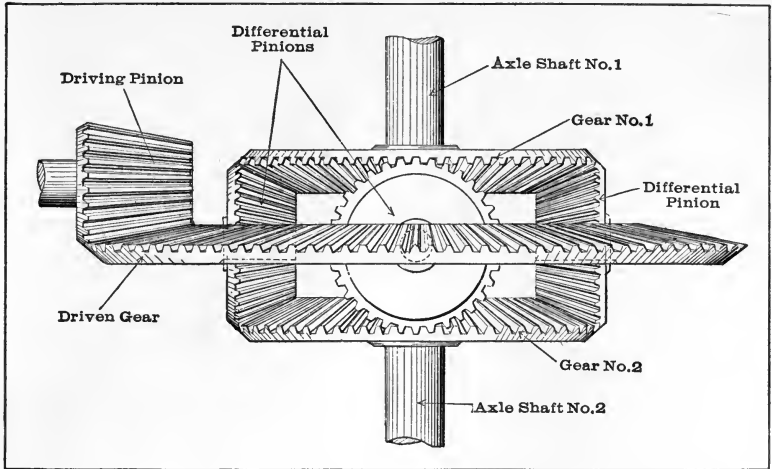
Illustrating Differential Gear Action when Applied to Bevel-Gear Drive Axle.
